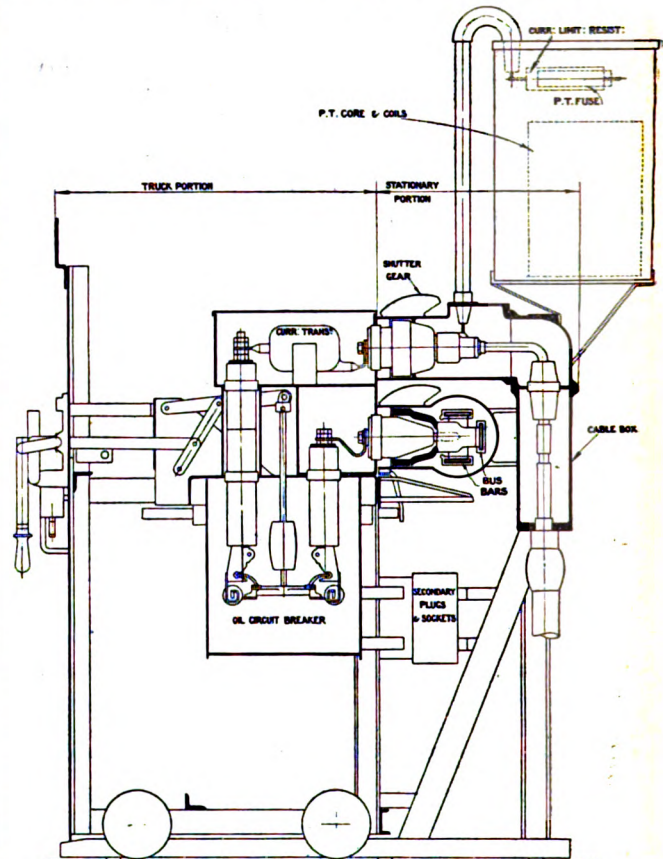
Metal-clad compound-filled horizontal draw-out truck-type switchgear unit.
